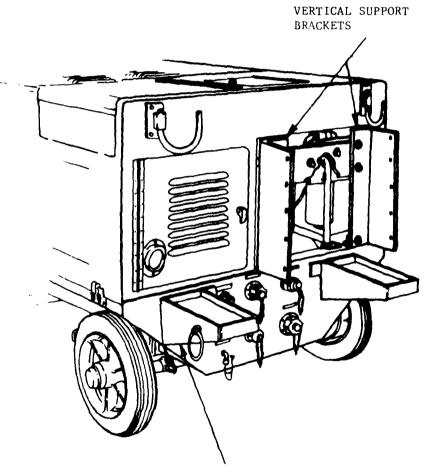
Mounting Lugs and Attachment Points to AHT-64 Chassis
